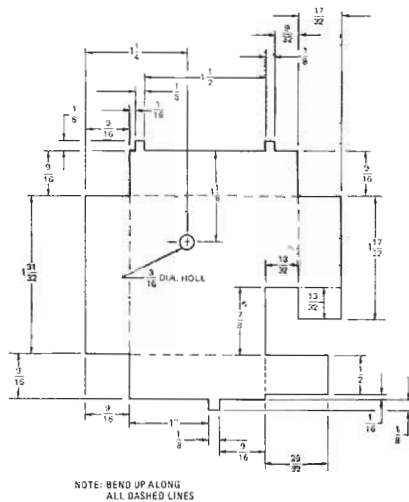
TOP RF SHIELD is cut from sheet metal and soldered to component side of main board.
